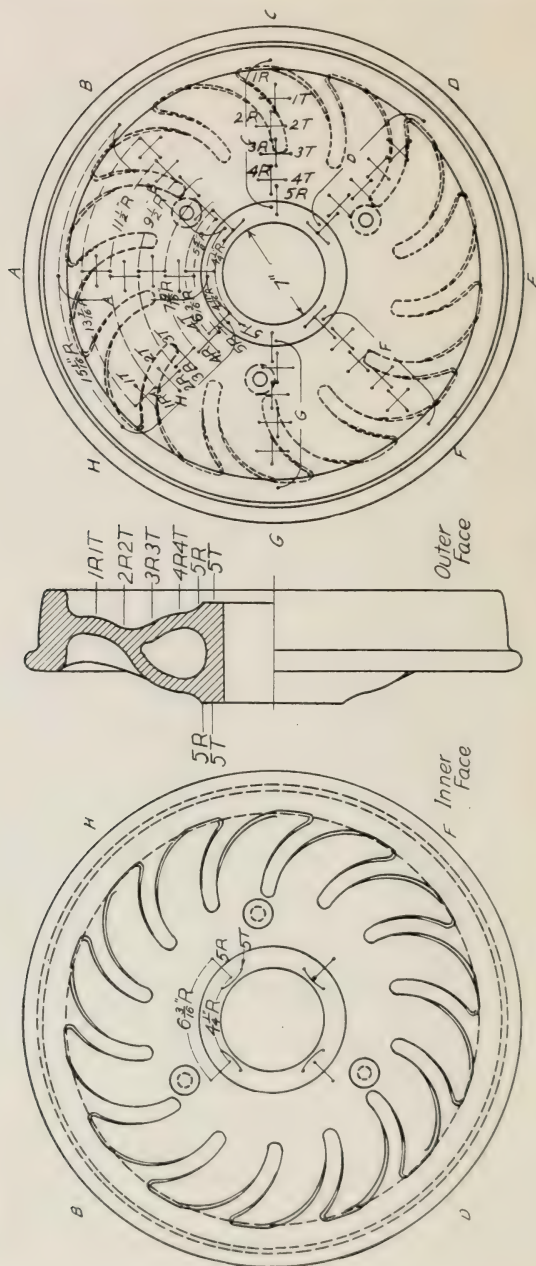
LOCATION OF GAGE LINES ON 33-IN. 725-LB. M. C. B. WHEEL No. 671 237
